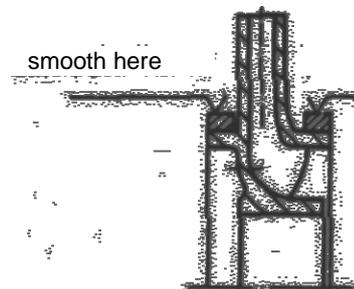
Smoothing out the throttle sections on the impeller wearing rings.
